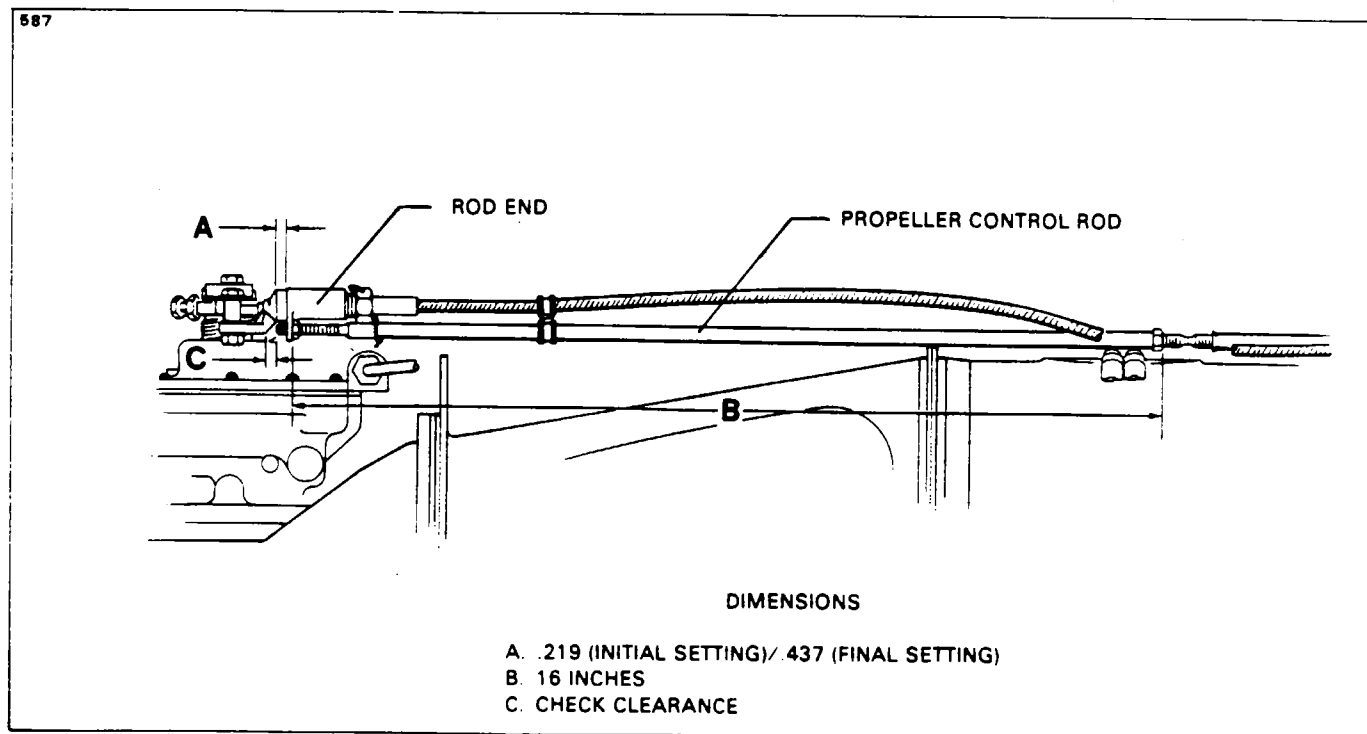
Propeller Synchrophaser Rigging (Left Engine Only)
